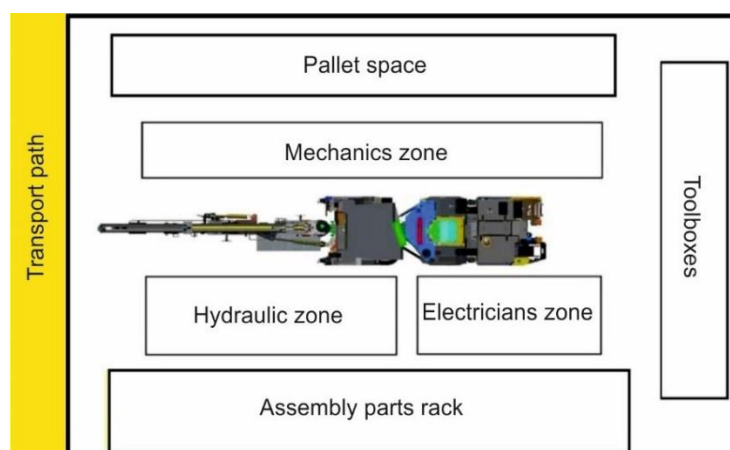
Diagram of the assembly station after introducing the assembly zones
